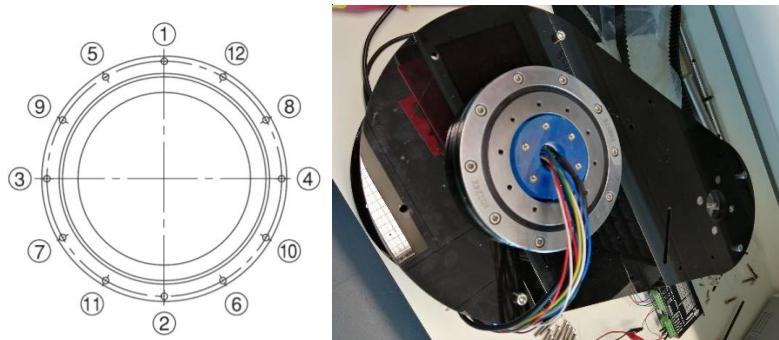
Crossed roller bearing installation method (left) and Cross roller bearing installed (right).
